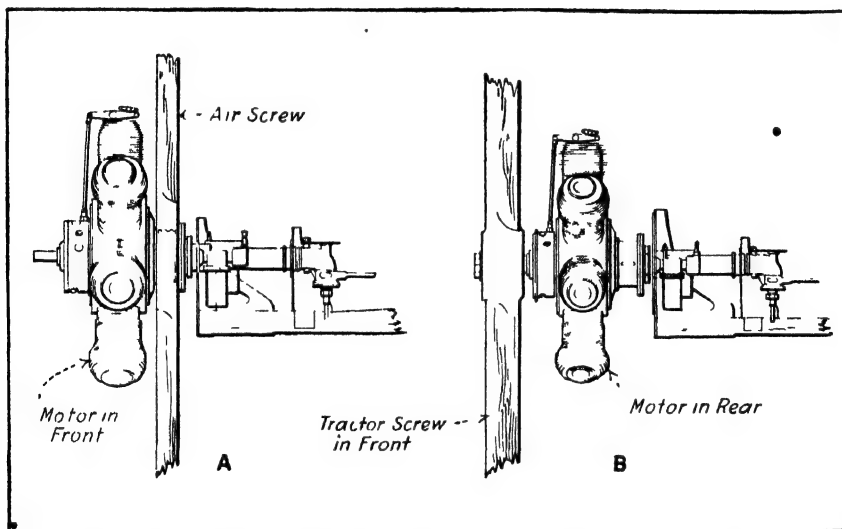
Diagram Showing Two Methods of Placing Propeller on Gnome Rotary Motor. A—Motor in Front of Air Screw. B—Common Method in Which Tractor Screw was Placed in Front of the Motor.
